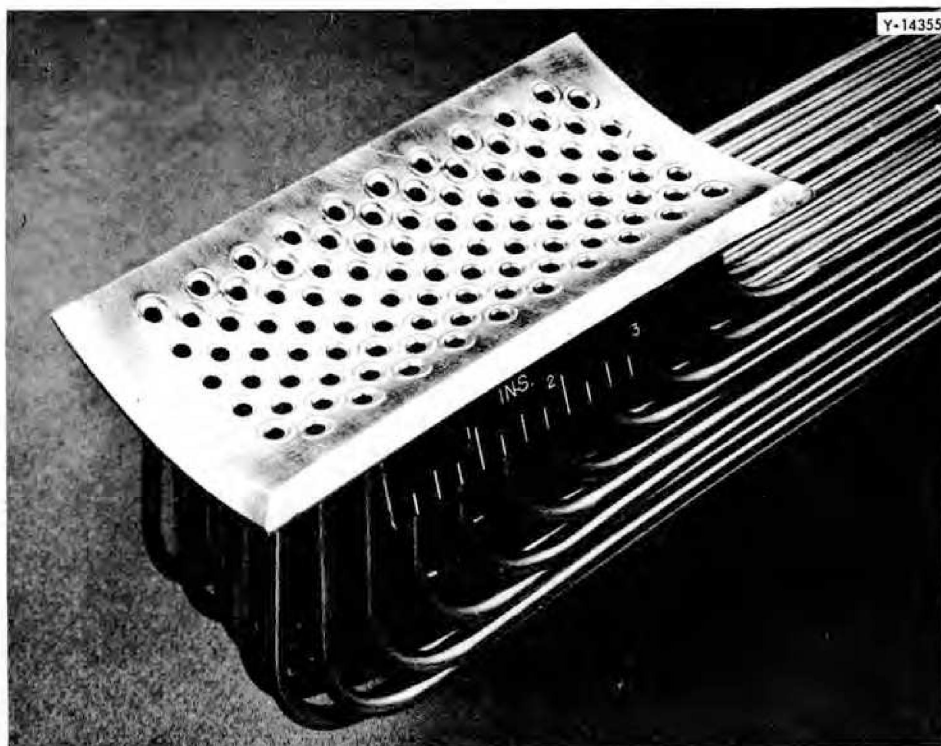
One End of Heat Exchanger after Welding Tube-to-Header Joints.
